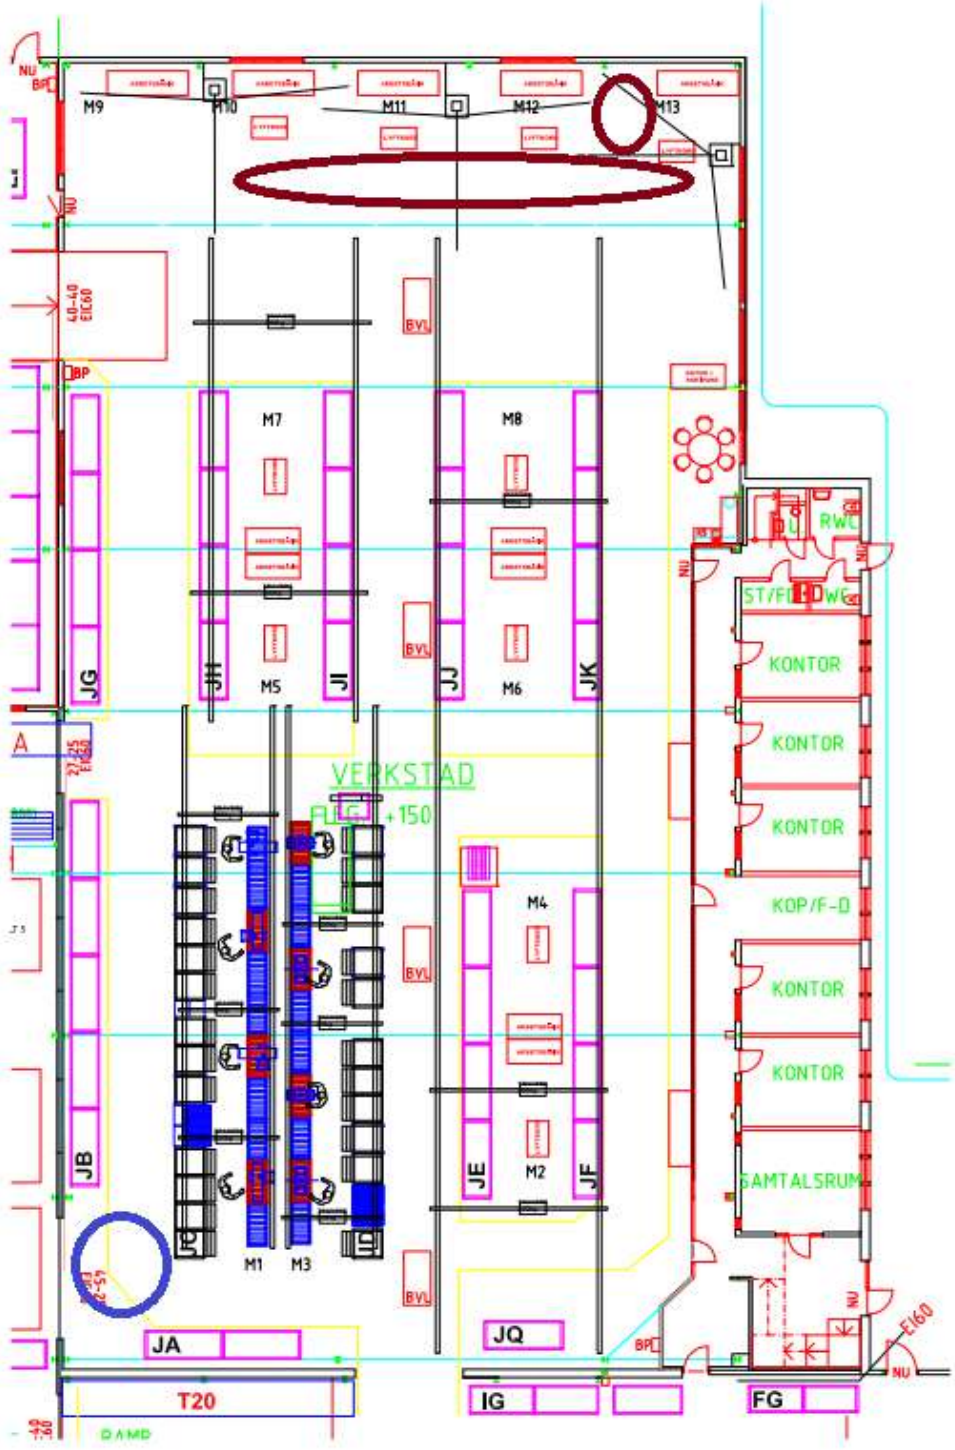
Drawing of assembly department with marked areas. [Own pictures].
